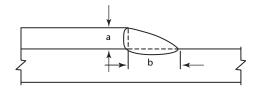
Determination of unequal leg fillet weld size, an $a \times b$ weld.
